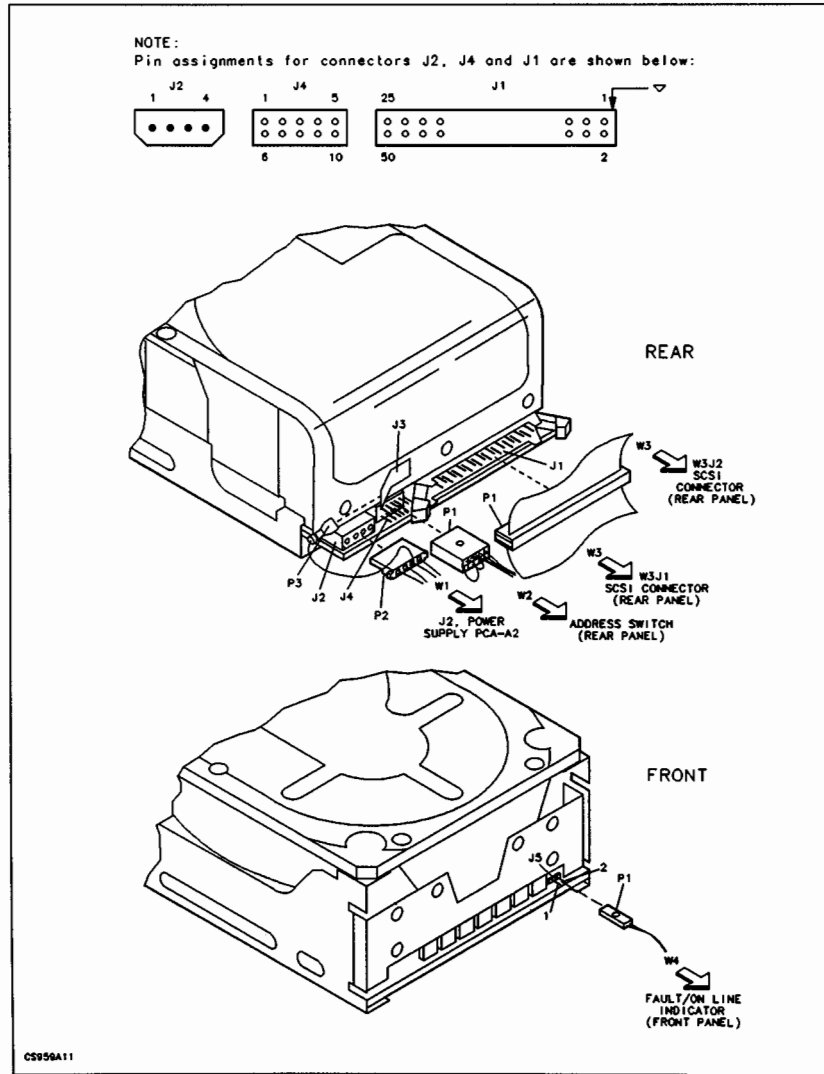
Disc Drive Assembly A1, Layout and Cable Connections
